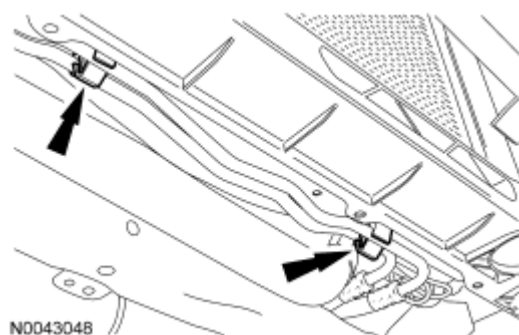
Locating Transmission Fluid Cooler Tubes Retainers
